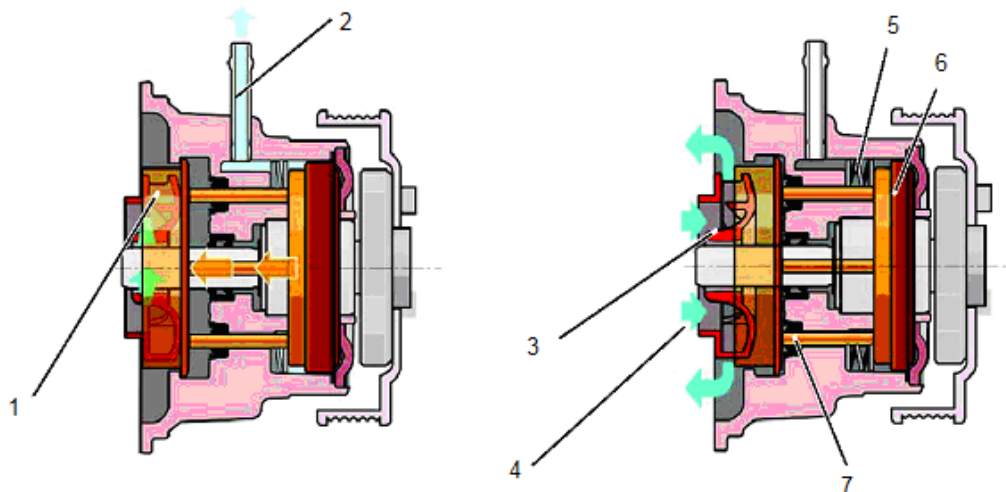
pump control by closing the two-state liquid flow [VW] 1 - closing the flow tube, 2 - vacuum passage intake, 3 - pump impeller, 4 - coolant flow direction, 5 - spring, 6 - membrane, 7 - pusher
